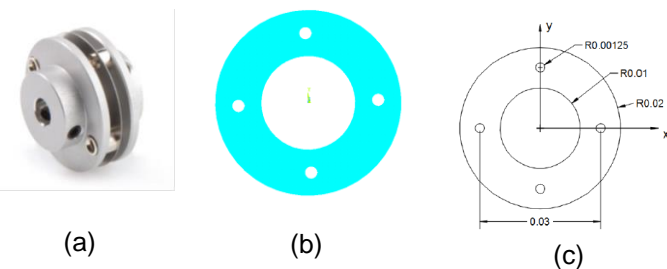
(a) Mechanical flexible single disc coupling; (b) Disc geometry and (c) Dimensions [m].
